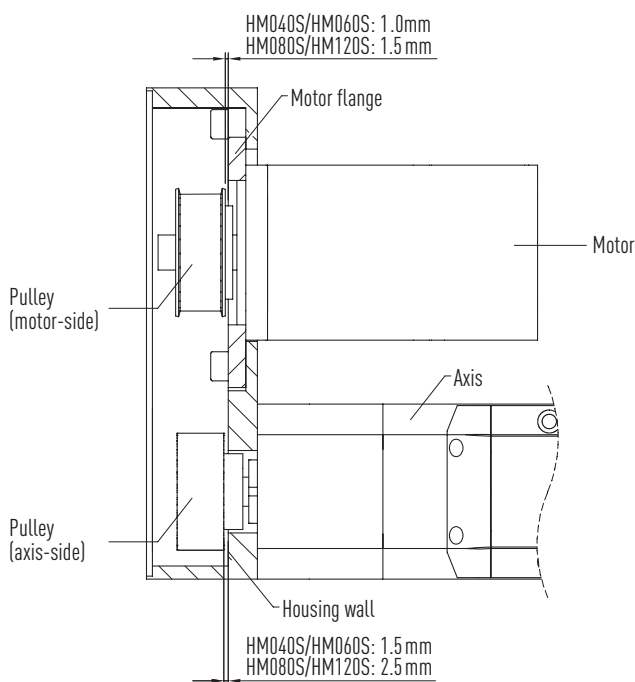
Safety distances between the pulley's flanged wheel (motor-side) and motor flange and between pulley (motor-side) and housing
